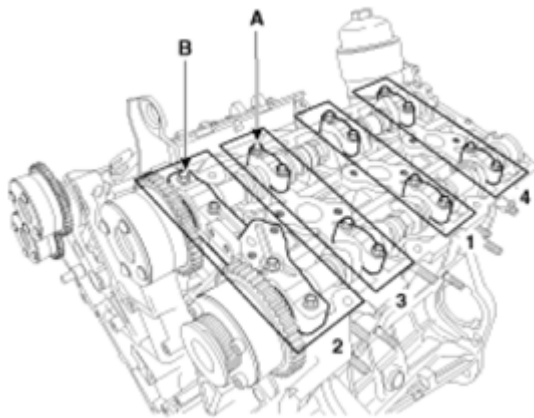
Identifying Camshaft Bearing Cap And Thrust Bearing Cap
